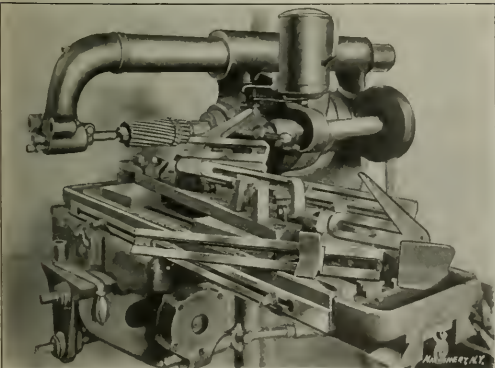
Work on which the Milling Machine is Superior to the Planer.
